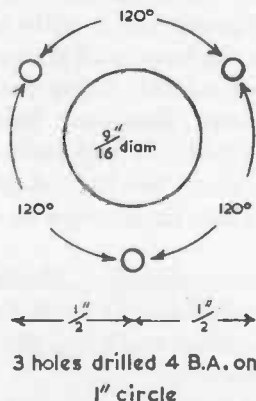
MOUNTING HOLES FOR MINIATURE TUNERS.
